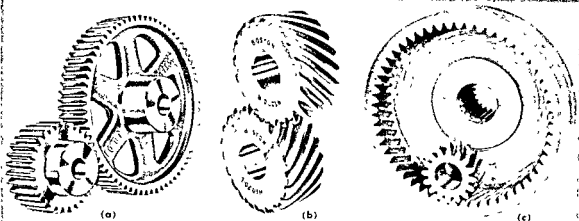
Spur gears. (a) External spur gear and pinion. (b) Single helical gear (Boston Gear Works). (c) Helical
